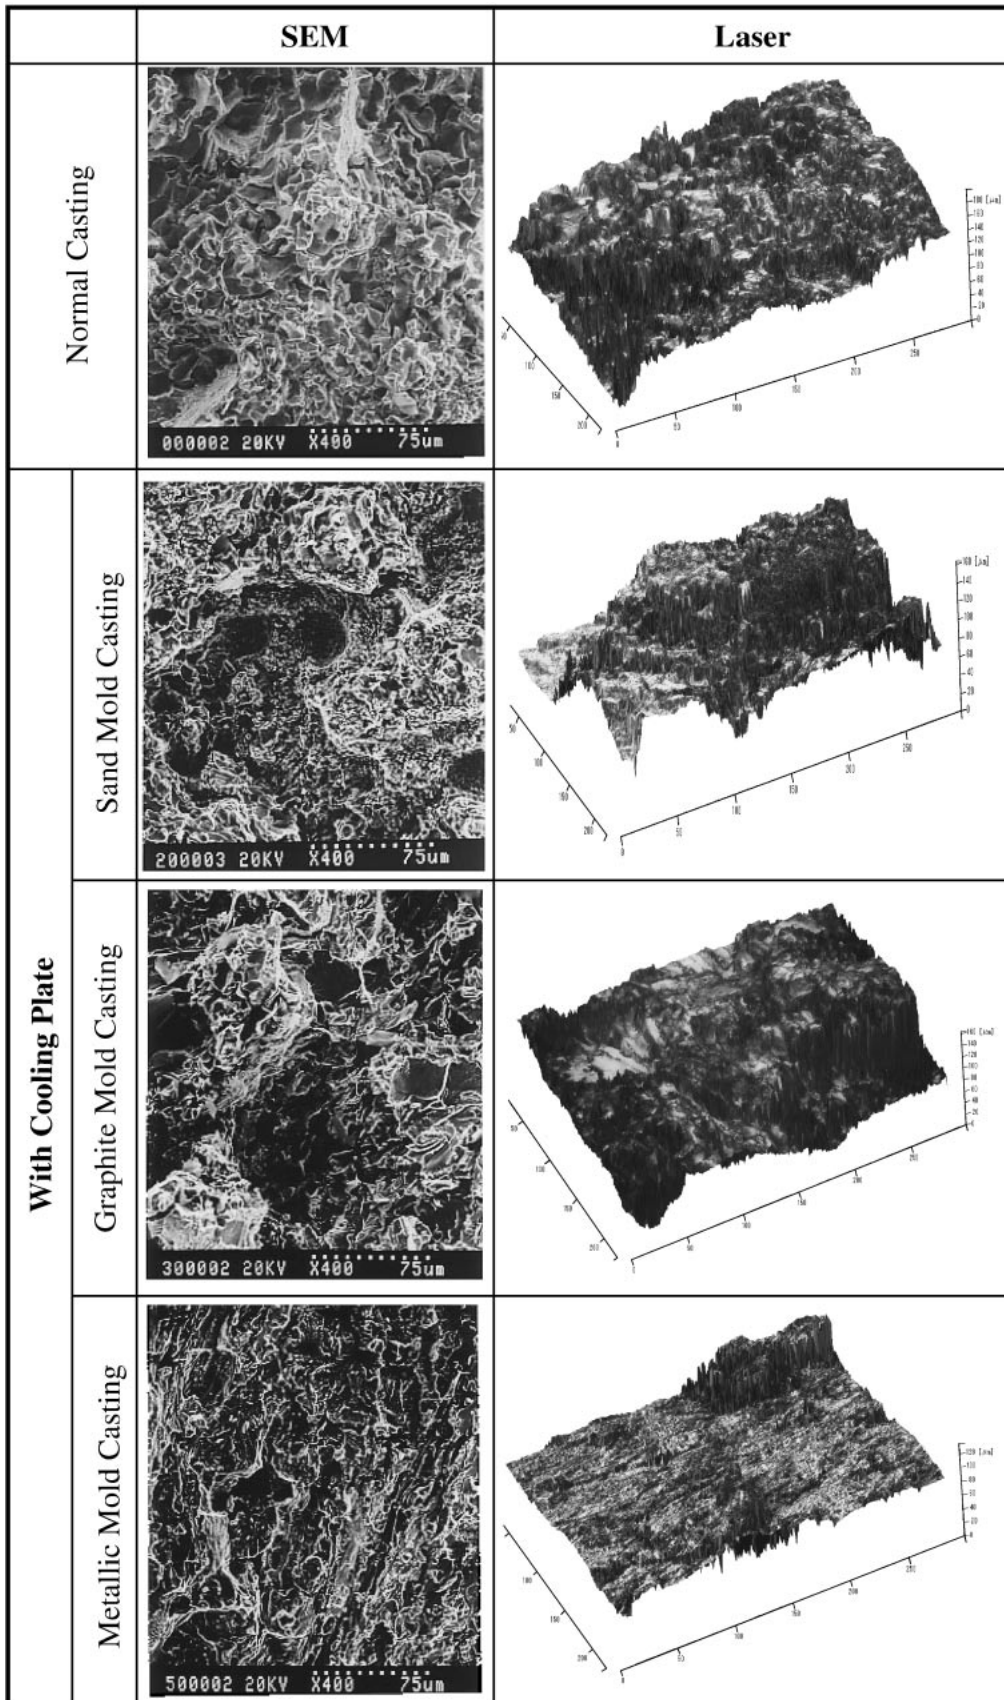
Fracture surface for samples of composition 4 cast using different molds.
